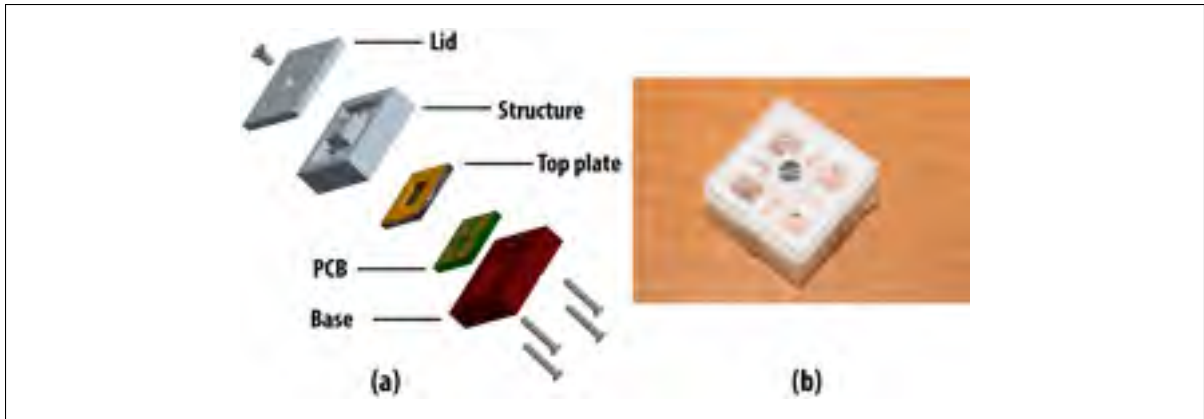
Prototype of the triaxial force sensor: (a) CAD-generated exploded view, (b) packaged sensor
